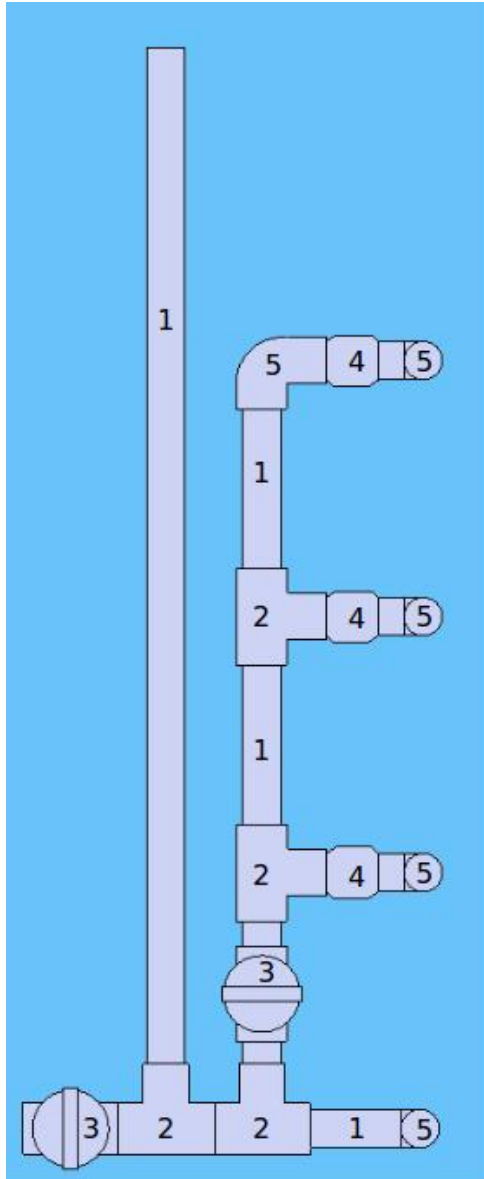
The Inlet Manifold: (1) 2" PVC pipe (2) 2" tee (3) 2" ball valve (4) 2" swing check valve (5) 2" elbow
